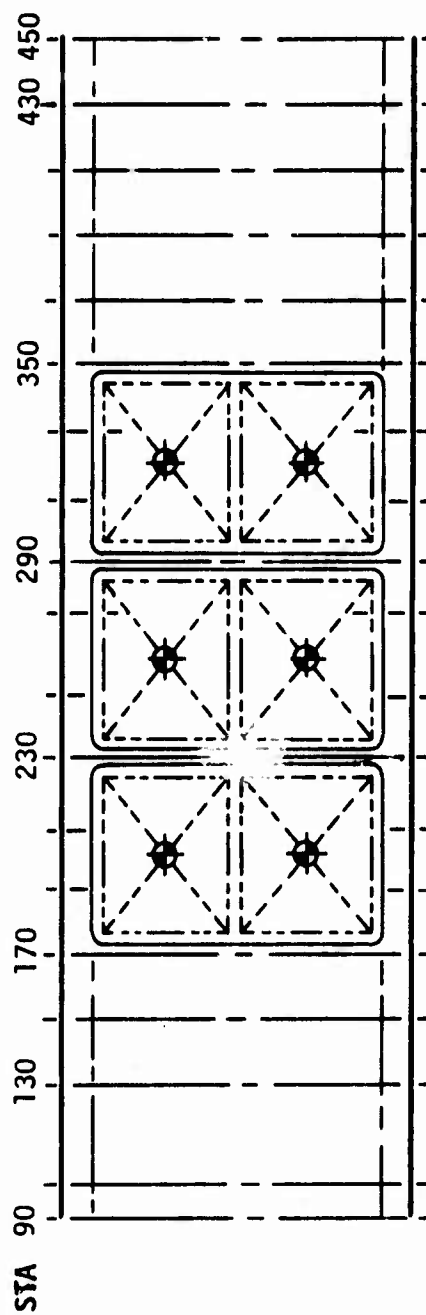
(U) Structural Arrangement for Double Row of Six 40 x 48 Cargo Pallet Exits.
